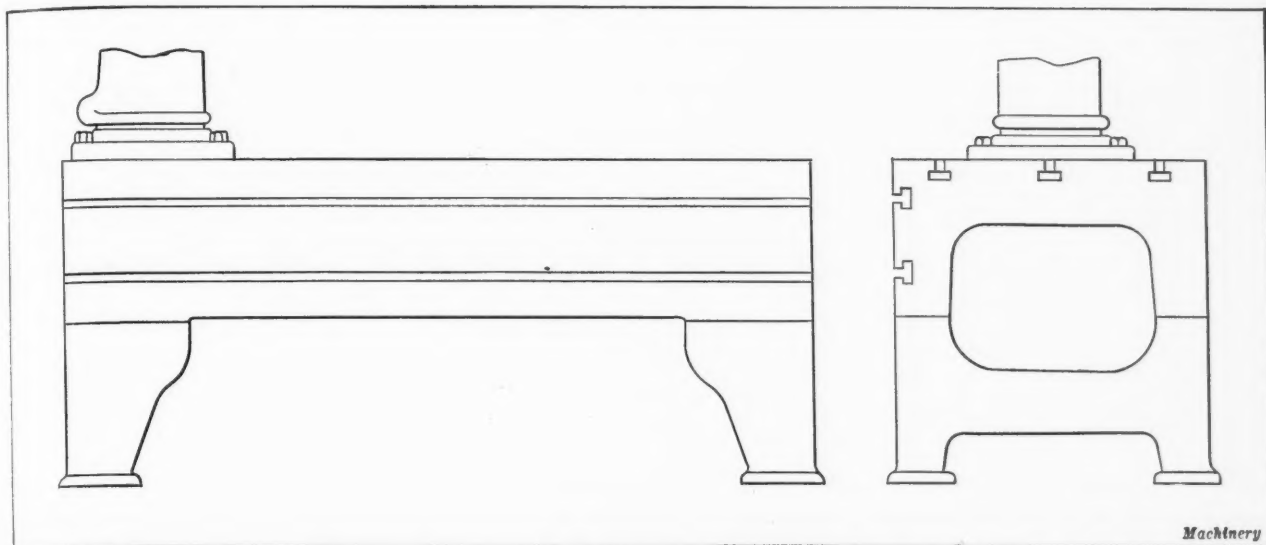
Drilling Machine Table which is a Compromise between the Angle and Box Types, T-slots being provided only on the Top Surface and on One Vertical Face
